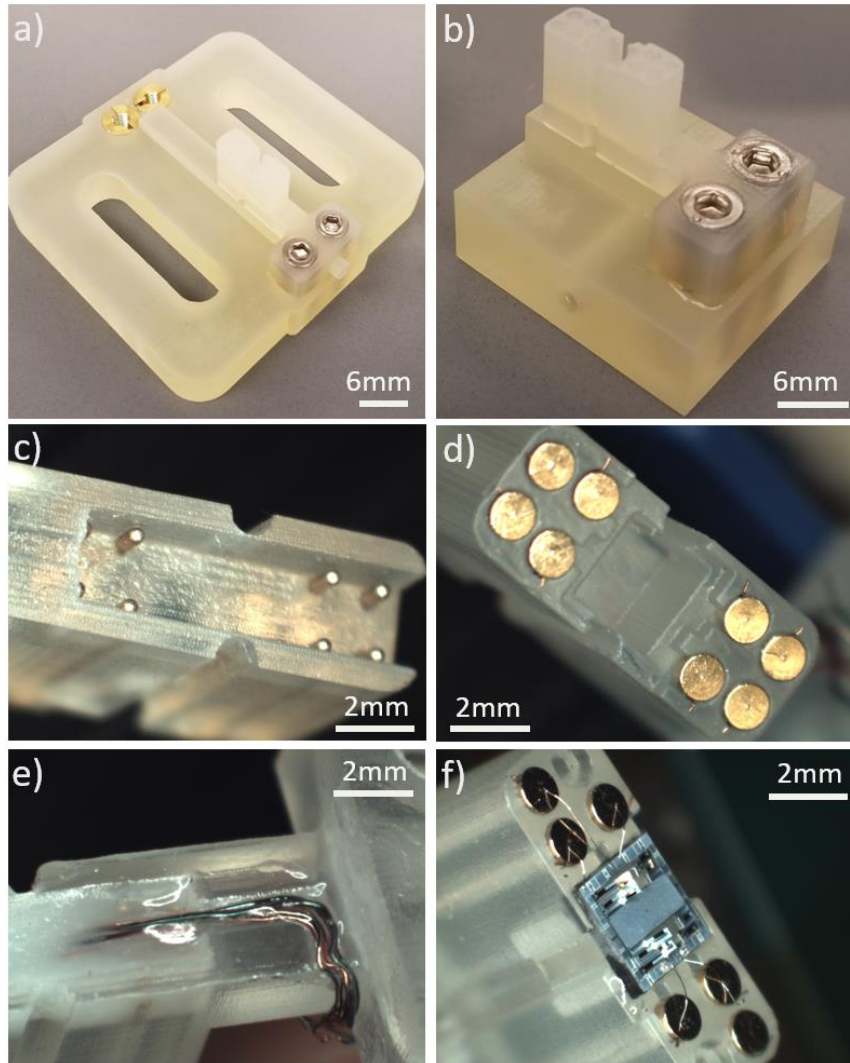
Steps to mount PZT actuator to a fixture for handheld system
